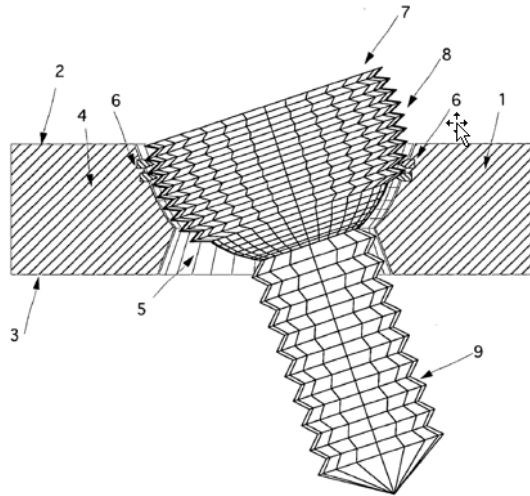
is a sectional view of screw 7 driven through hole 5 of bone plate 1, into bone underneath plate 1 (not shown), and locked at a tilt. *Id.* ¶¶ 27, 29, 30. Screw 7 has head 8, which “is threaded with a constant pitch.” *Id.* ¶ 30. Further, the wall of plate hole 5 “has a small number of isolated protrusions 6 (such as pegs or spikes), which number is within 2 and 30, designed to lock against the threaded spherical head of the screws 8.” *Id.* ¶ 32. “[O]nce the screw 7 has been driven in, it locks tightly against the protrusions 6 . . . in either perpendicular or tilted position,” with “up to 20 degrees of angulation in any direction” being allowed. *Id.* ¶ 33.
